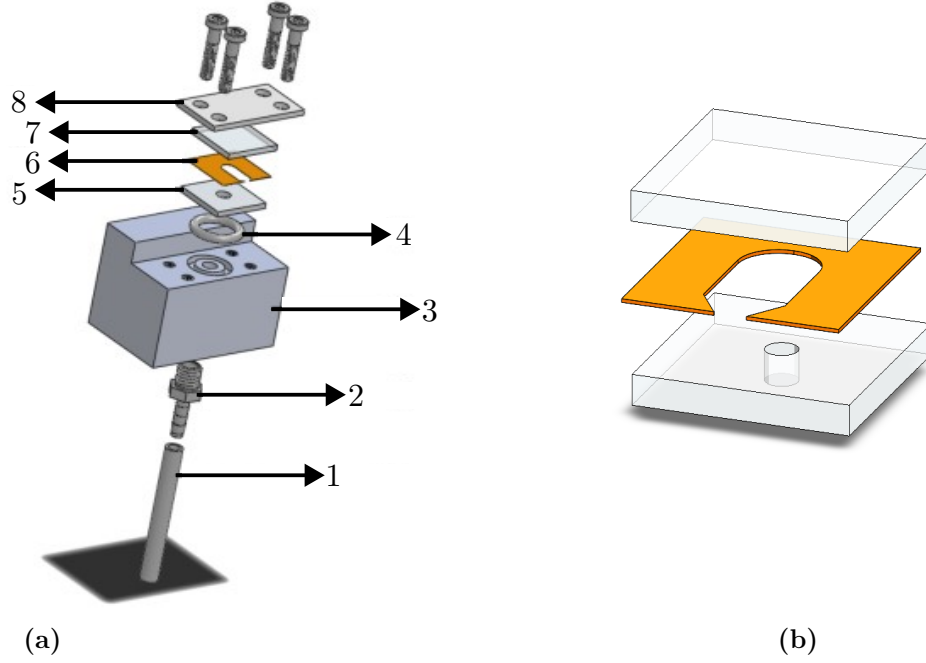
(a) Stacked model with (1)-tubing (2)-inlet fitting (3)-Al body (4)-O-ring seal (5)- base plate (6)-polyimide nozzle (7)-top plate (8)-tightening lid (b) Exploded view of different layers in the stacked model
